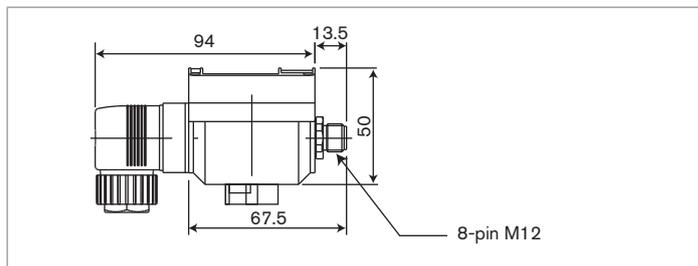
Dimensions [mm] of the SE32 electronic module with an 8-pin M12 fixed connector
